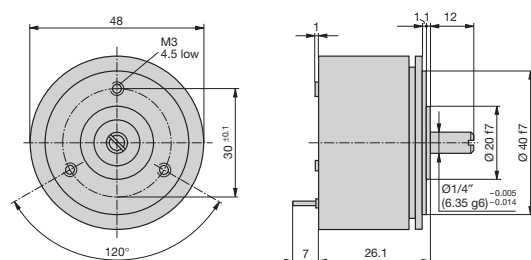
KINAX 3W2 with special drive shaft at front only,
